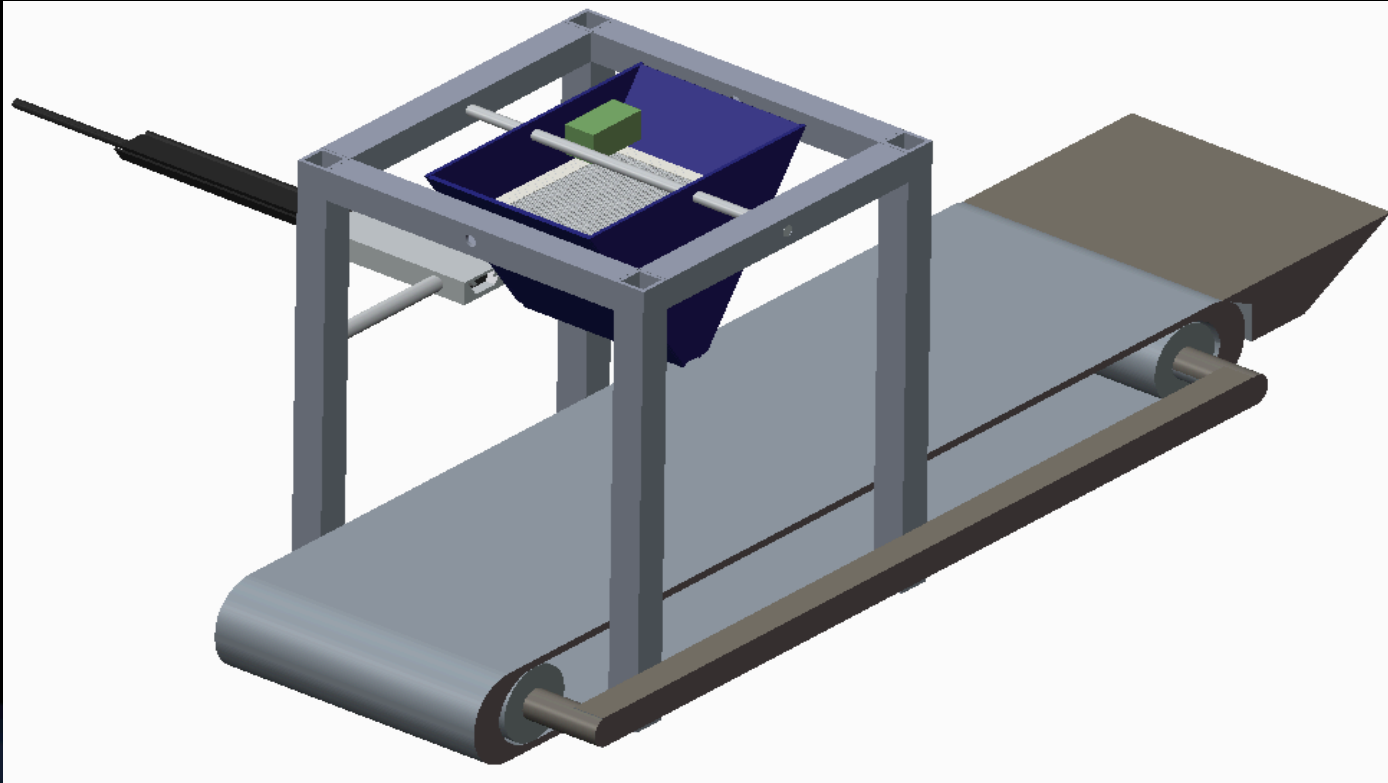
Completed CAD Drawing of Prototype machine which includes all changes that occurred due to construction issues that arise.
